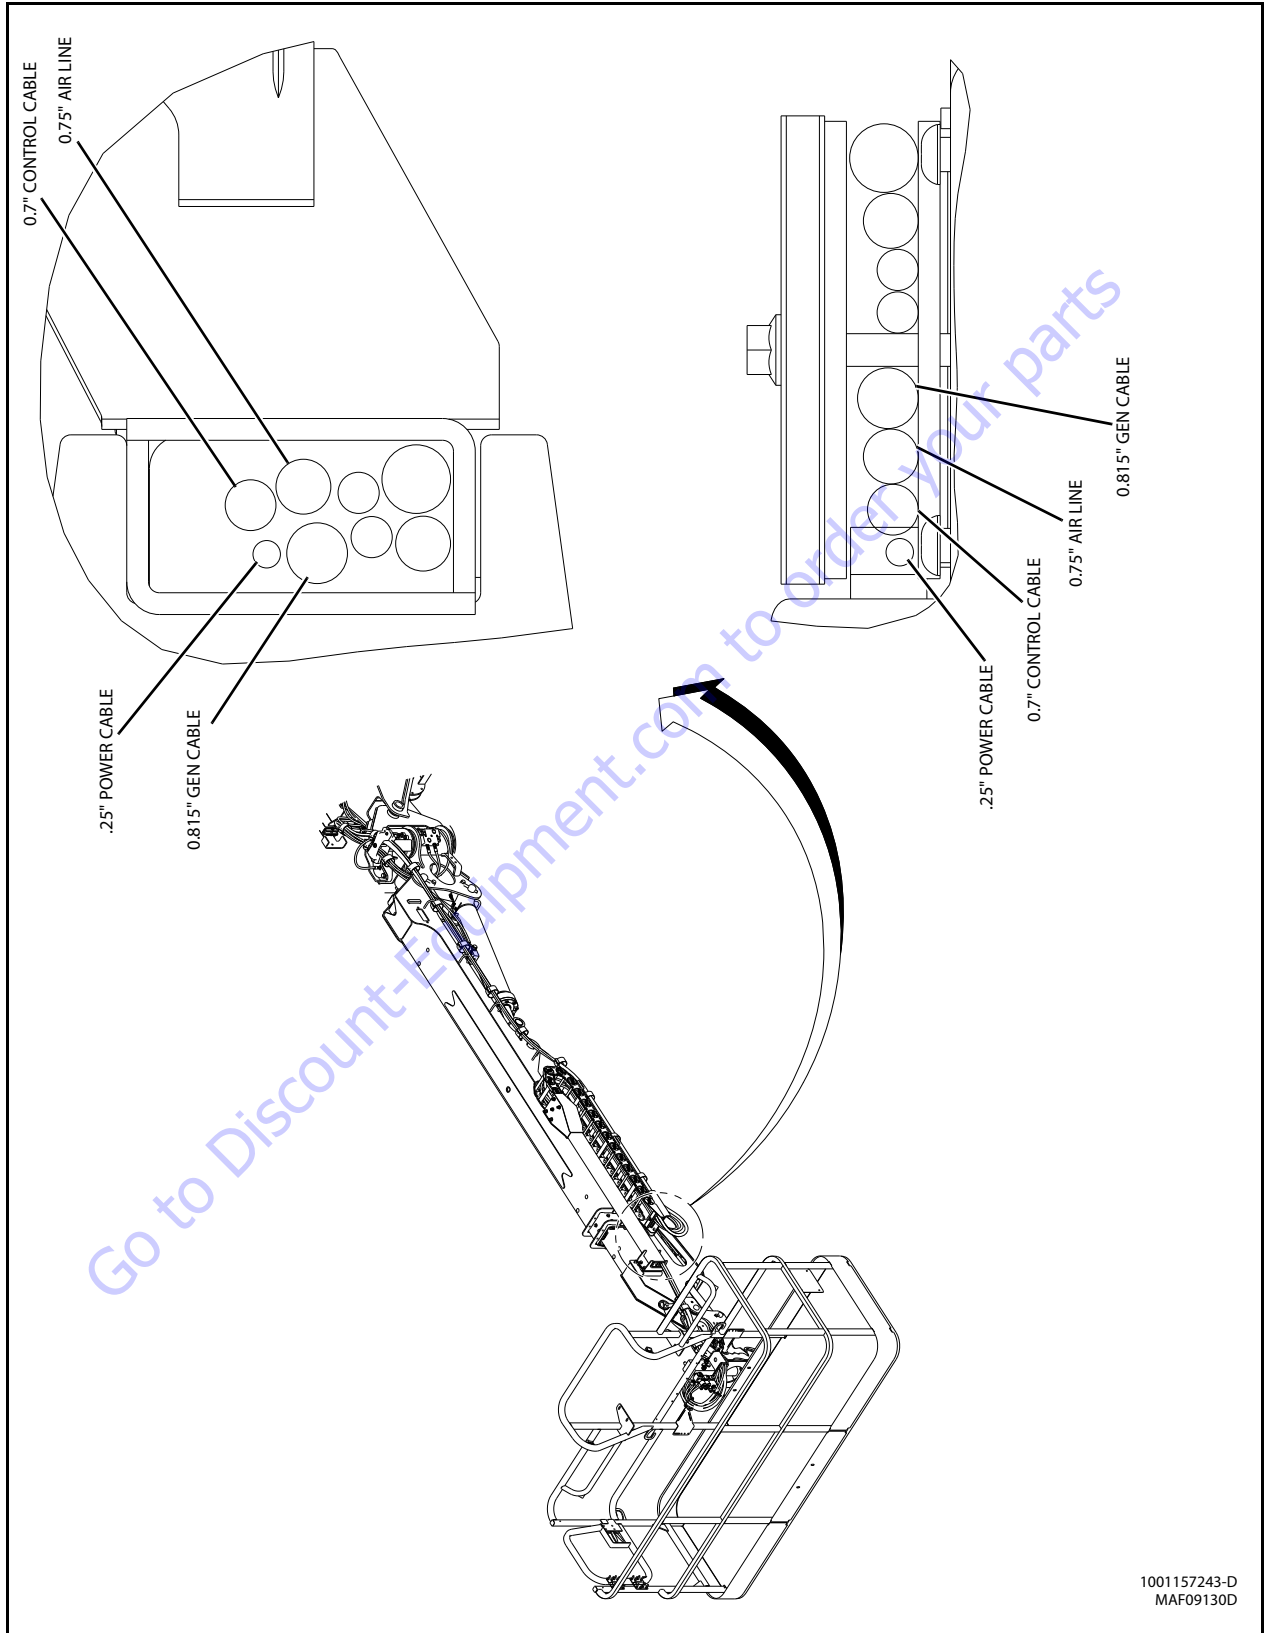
Jib Hydraulics - Sheet 6 of 7
